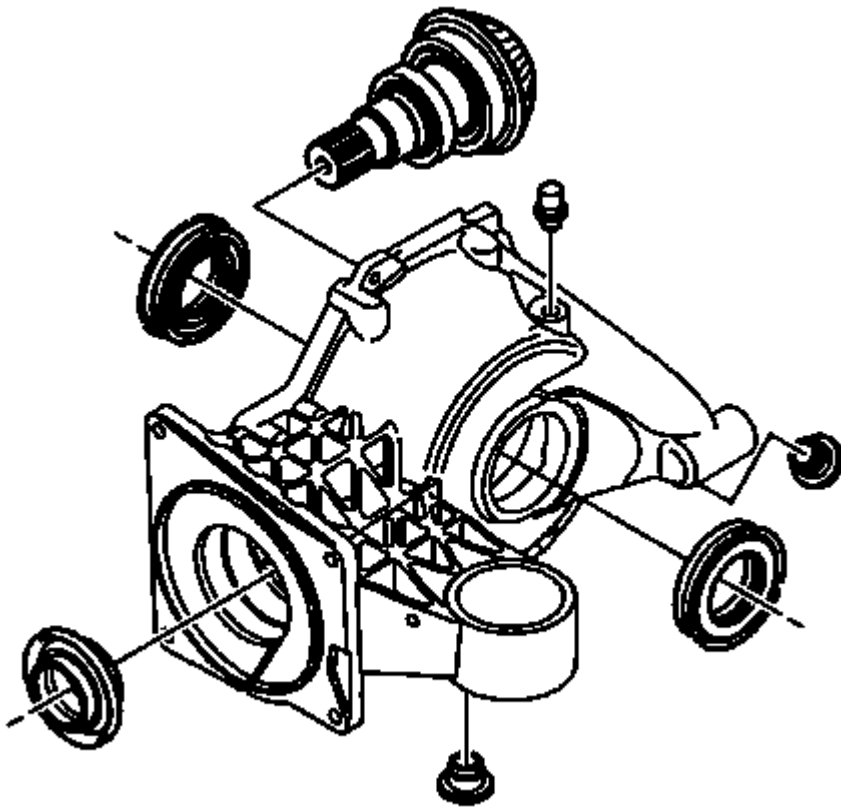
Locating Differential Carrier Assembly Housing & Seals
